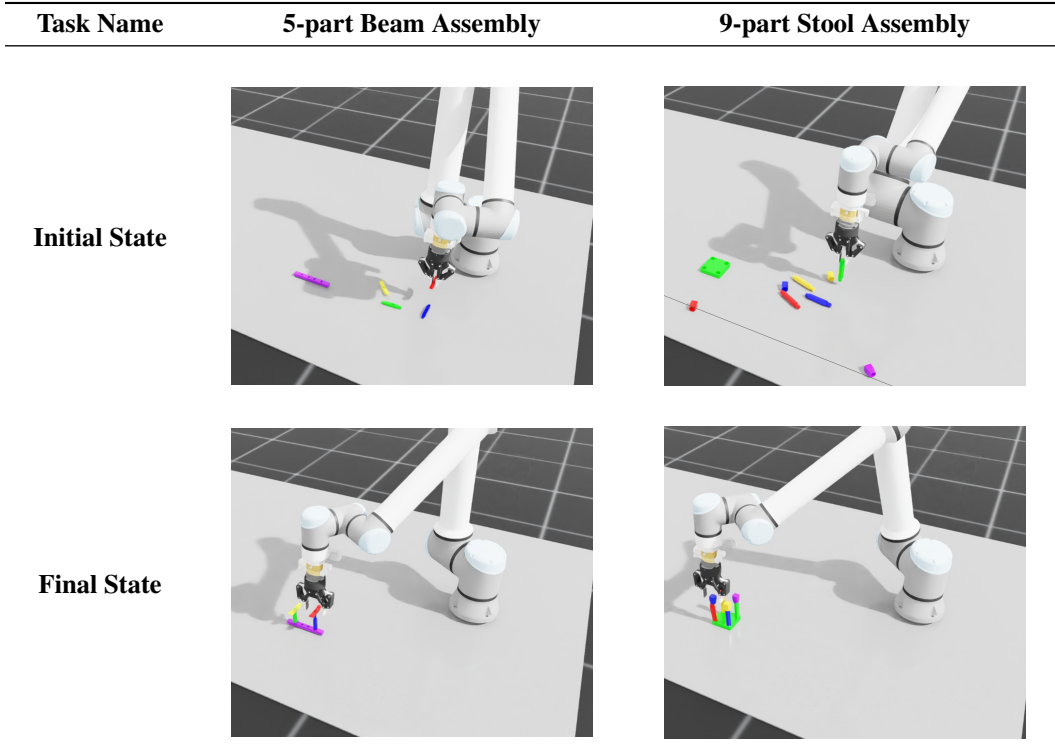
Simulation setup for Beam Assembly and Stool Assembly in IsaacLab.
